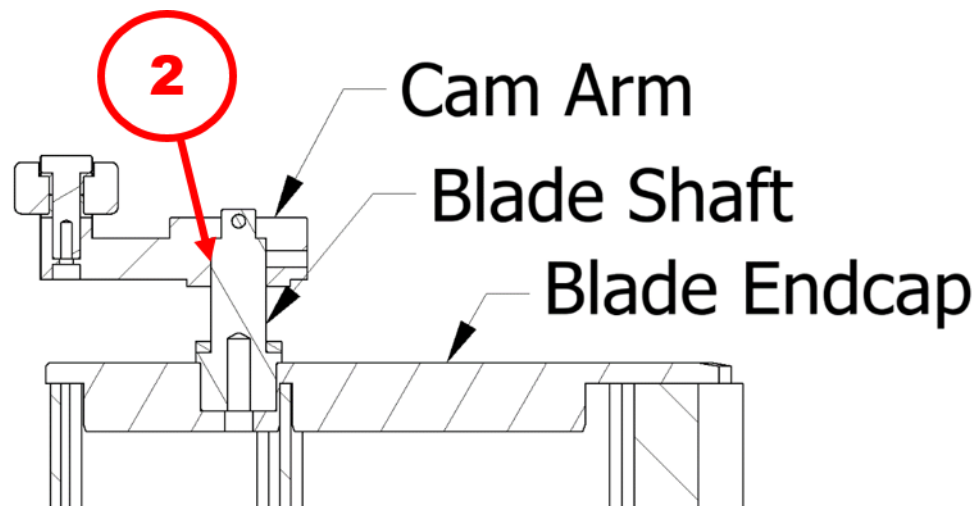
Cross-sectional schematic through the blade shaft to cam arm connection
